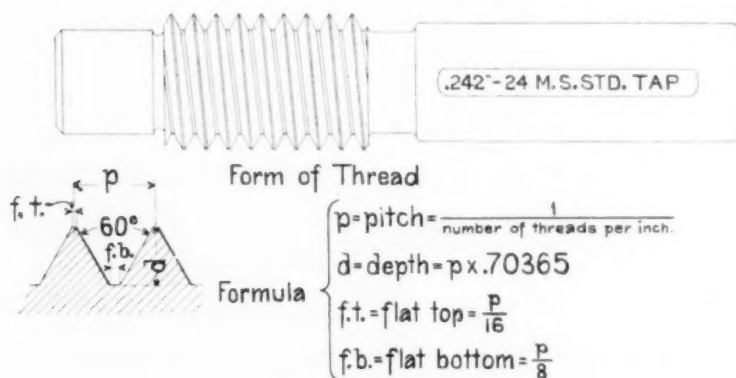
REFERENCE THREAD GAGES FOR TAPS
